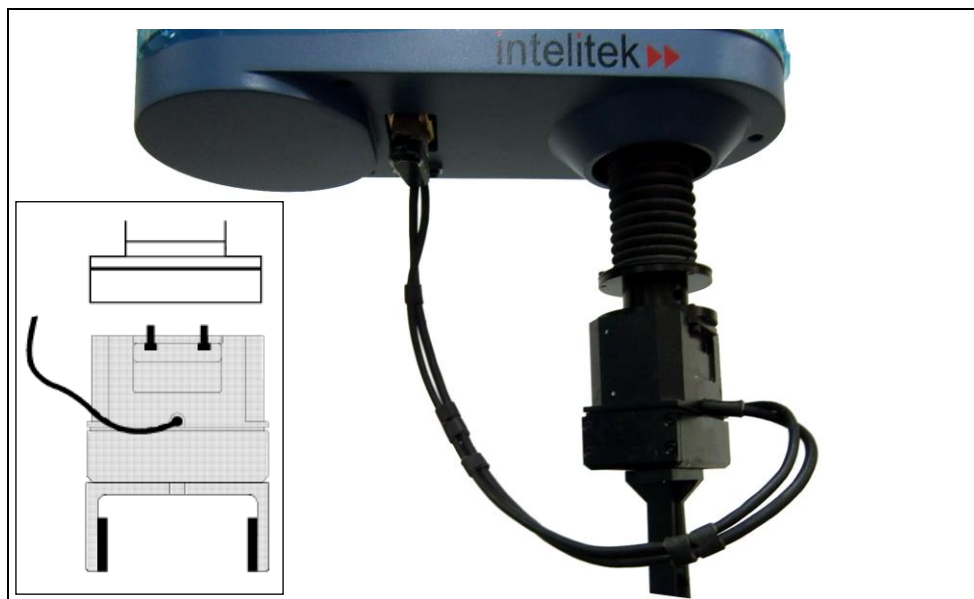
Attaching Gripper to SCORBOT-ER 14Pro
